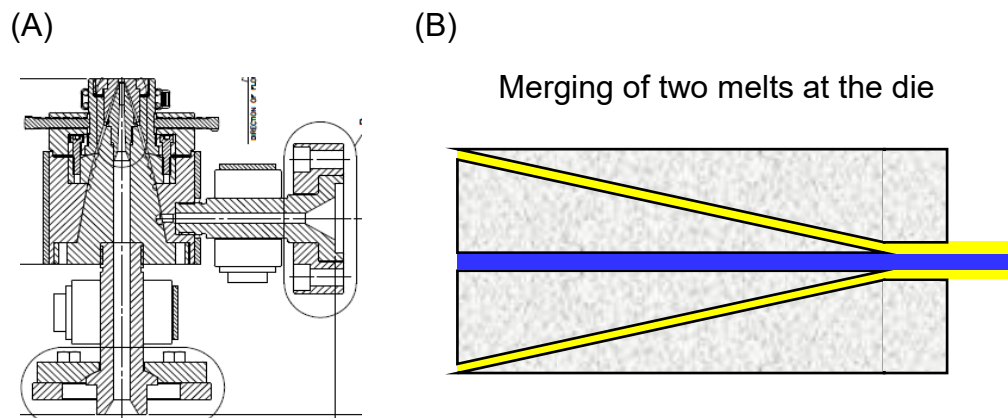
(A) Engineering drawing of the co-axial circular coextrusion die; (B) schematic illustrating melt flow of core- and shell- materials at the exit of the die.
